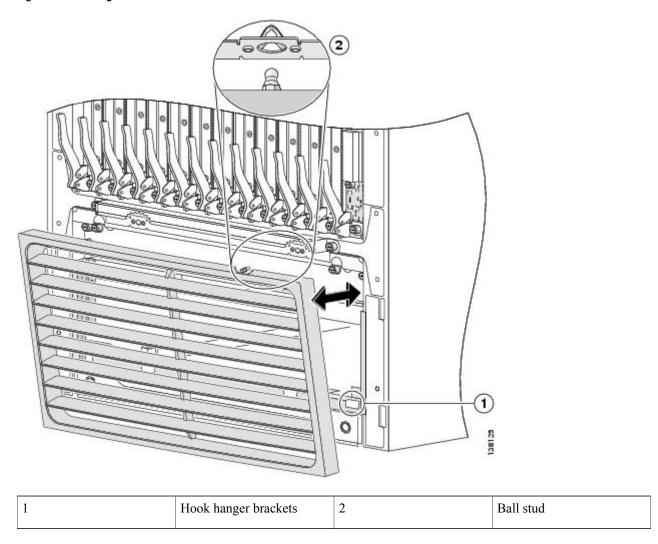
Installing the Lower Grille Screen and Frame Assembly
